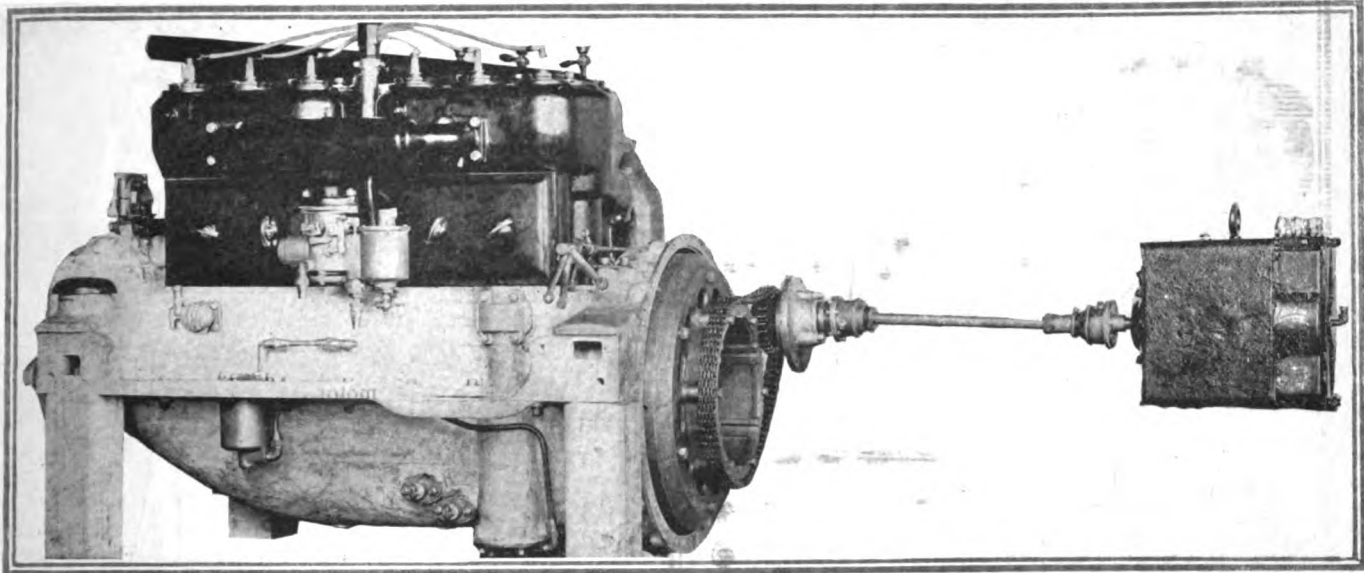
Intake side of motor and method of mounting the combined lighting and starting unit
